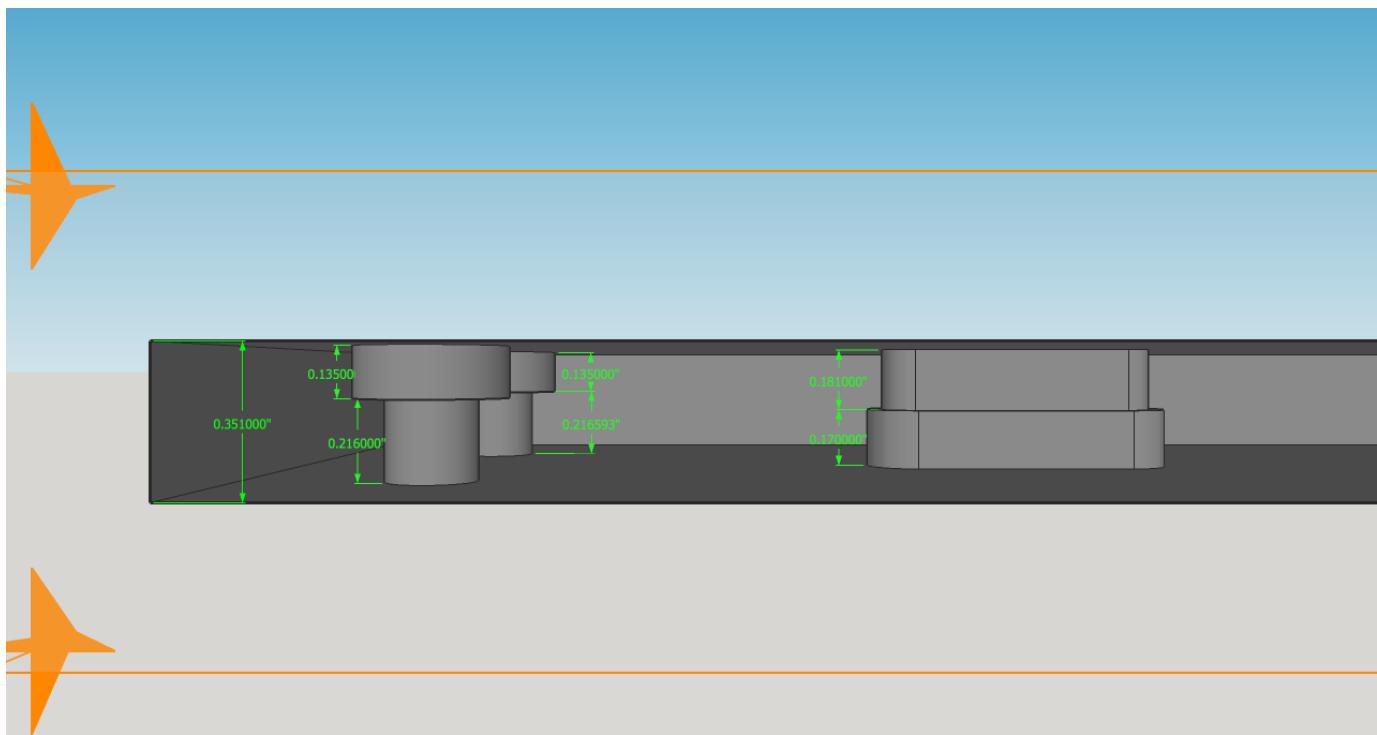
The front cross section view and measurements of the sFPI aluminum base
